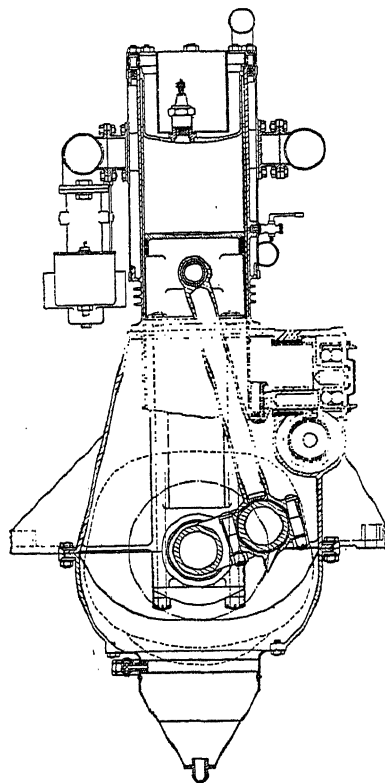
The Argyll single-sleeve valve aircraft engine.
